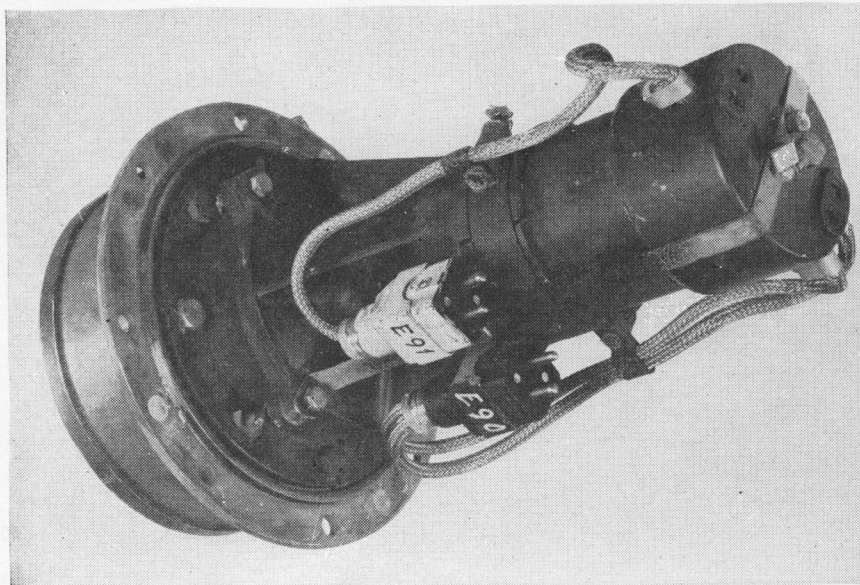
The main landing gear retracting motor and reduction gear, with boltholes where it is attached to the front spar.
